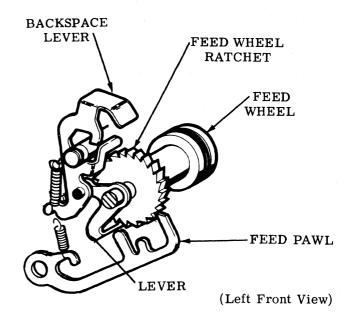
Feed Wheel Mechanism (Tape Feed Mechanism)
